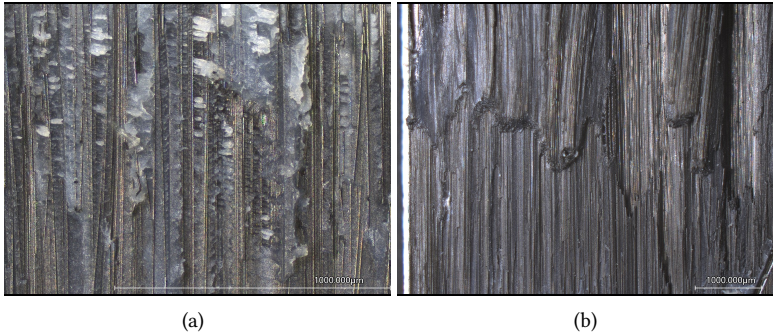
Close-up of fracture surface SLS of hot weld: a) Resin-rich area 10x; b) Fiber waviness/nesting and failure.
